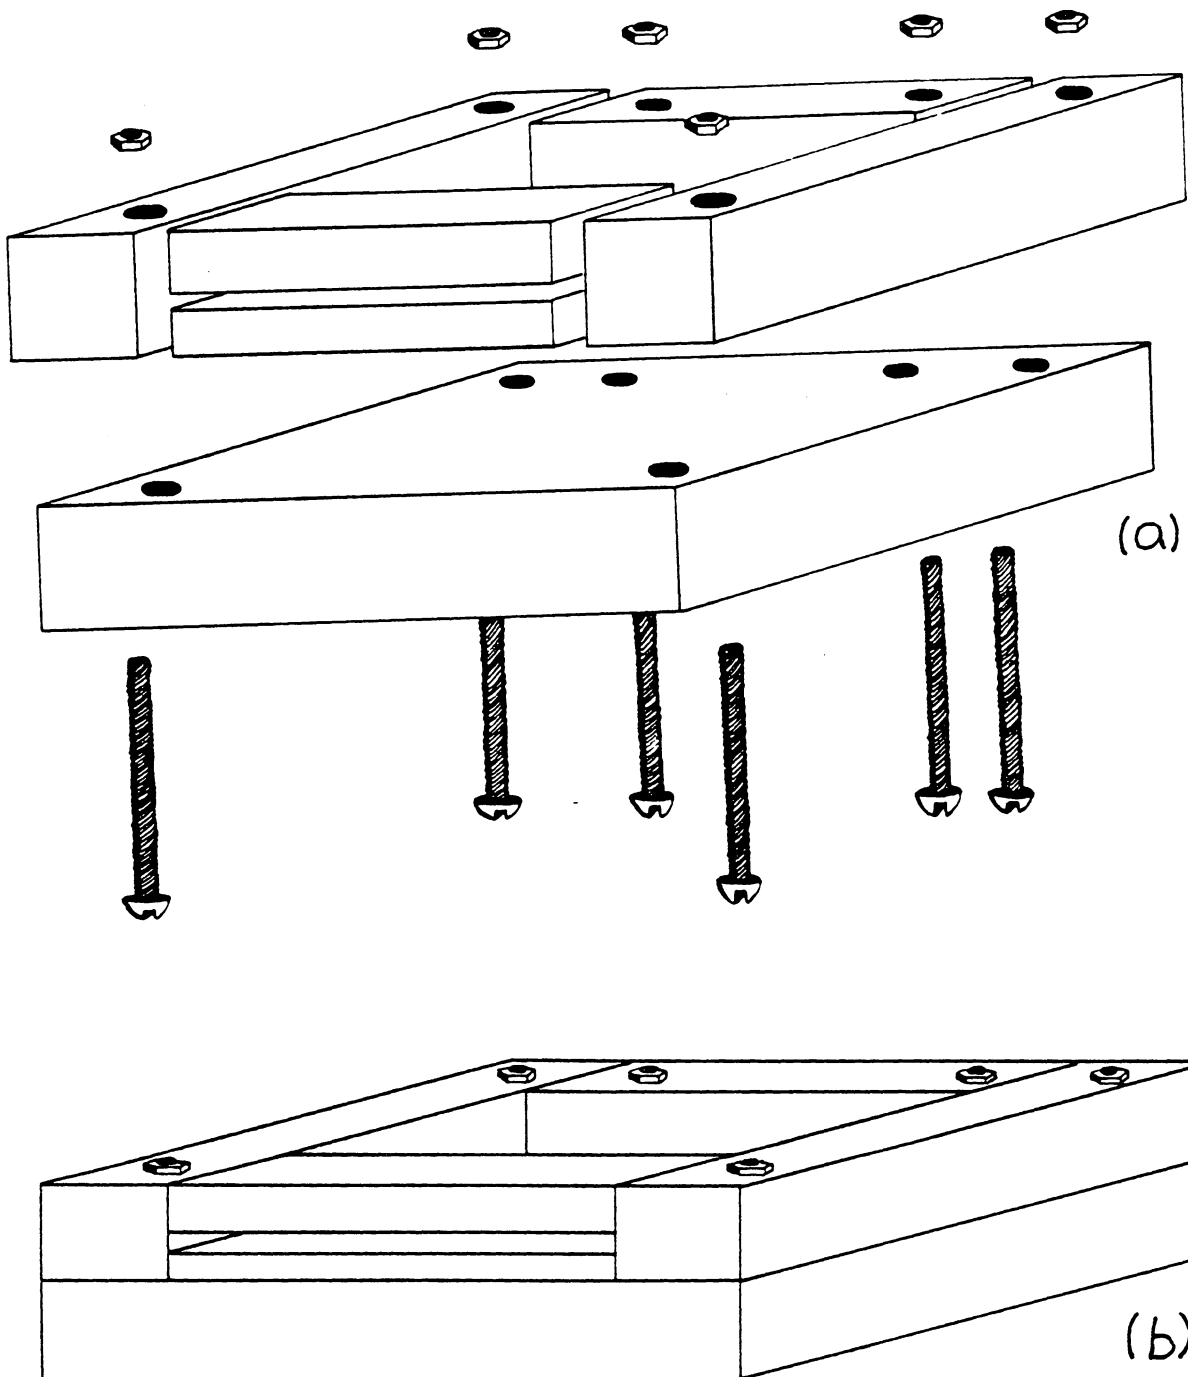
Mold for Casting the Sensor: a) Exploded View, b) Assembled View.
